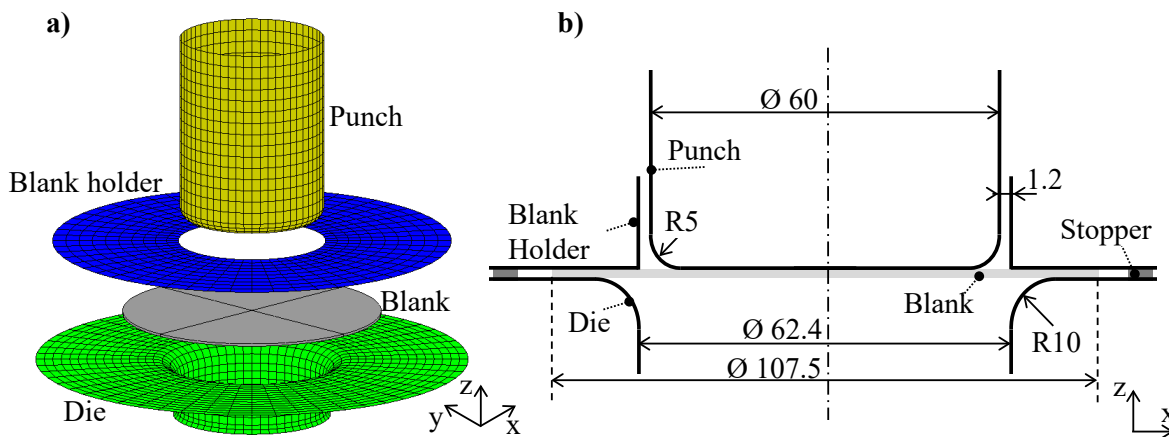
Cylindrical cup forming process: (a) numerical model; (b) dimensions of the tools and blank in mm (adapted from [12]).
